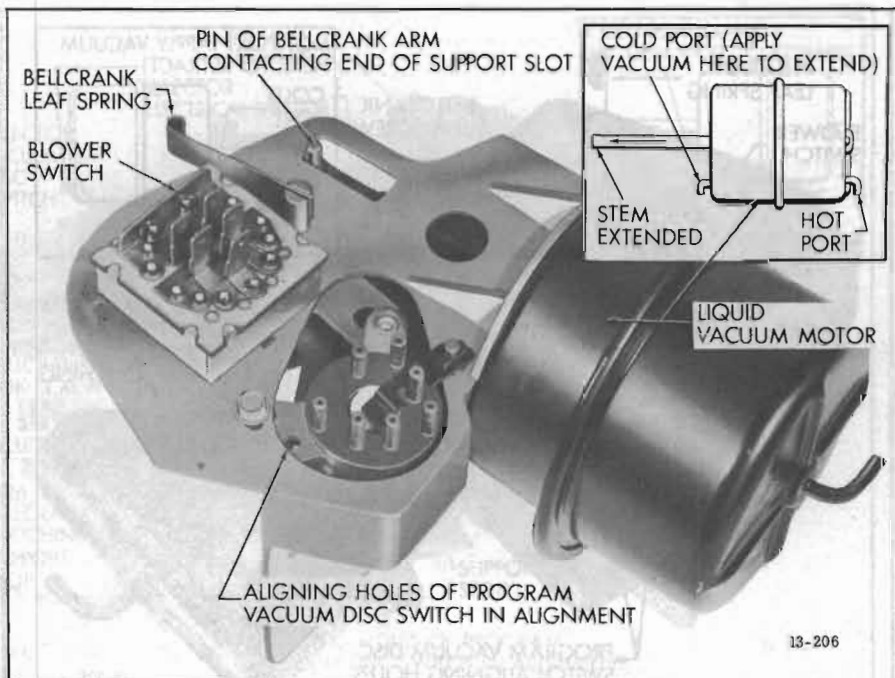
Liquid Vacuum Motor with Stem Extended (49000 Series)
